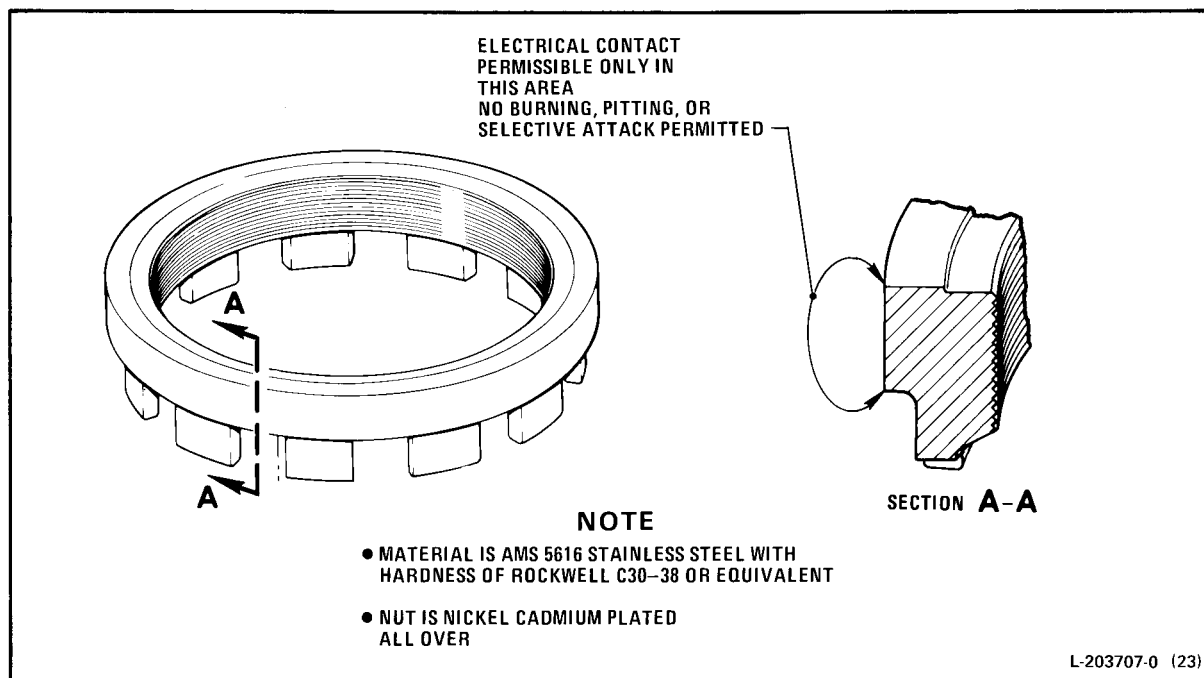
Bearing Retaining Nut (PN 4010237) - Nickel-Cadmium Plate Replacement
